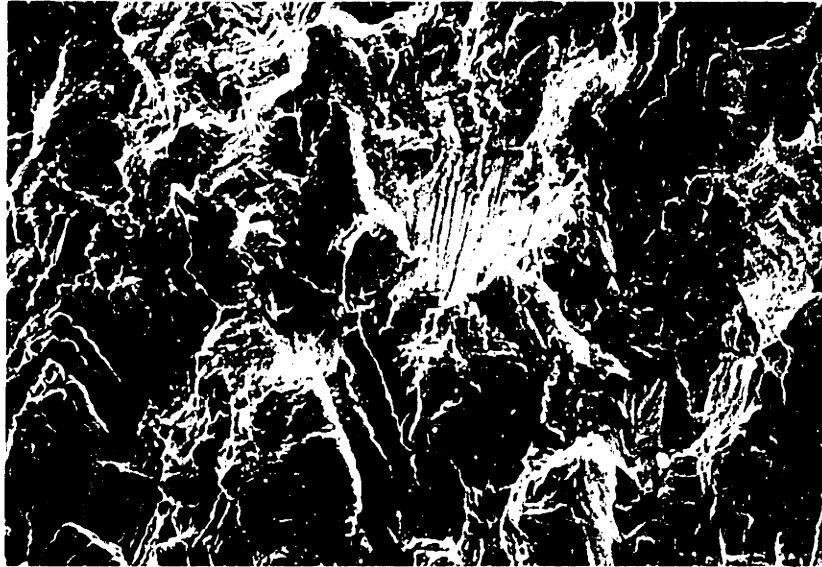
Fracture Surface of Sensitized Alloy-600 Showing General Topography, 500X. Crack Path from Bottom to Top. ΔK Approximately 40 MPa \sqrt{m} .
